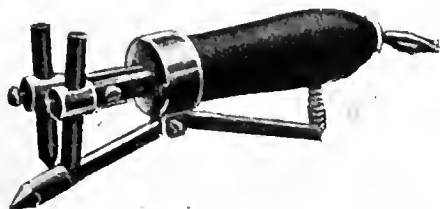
ELECTRODE-HEATED SOLDERING IRON.
